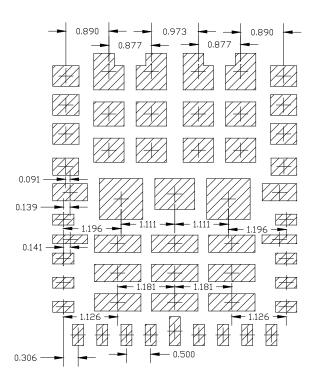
Stencil Pad Spacing Detail 1 (Dimensions in mm)
